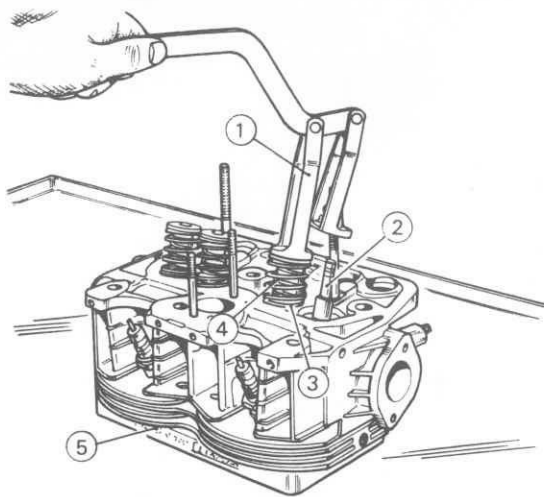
9 Compressing valve springs with Fiat tool A.60084
